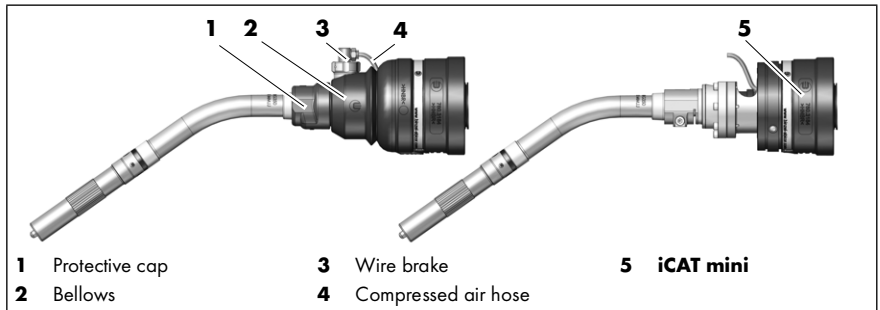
Cleaning - iCAT mini with wire brake and welding torch neck ABIROB® G
